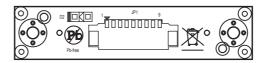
MR-5100RA-2 Daughter Board Component Locations (Bottom View)
